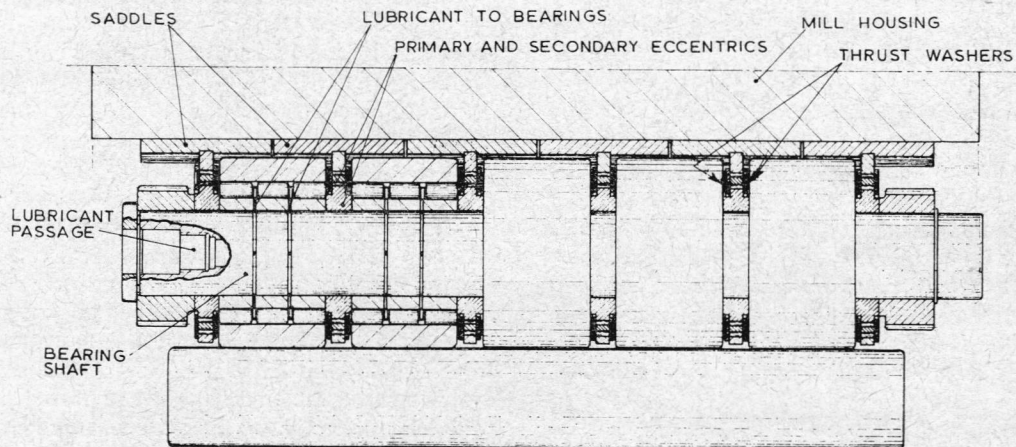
Section through a typical backing assembly of a Sendzimir cold rolling mill
